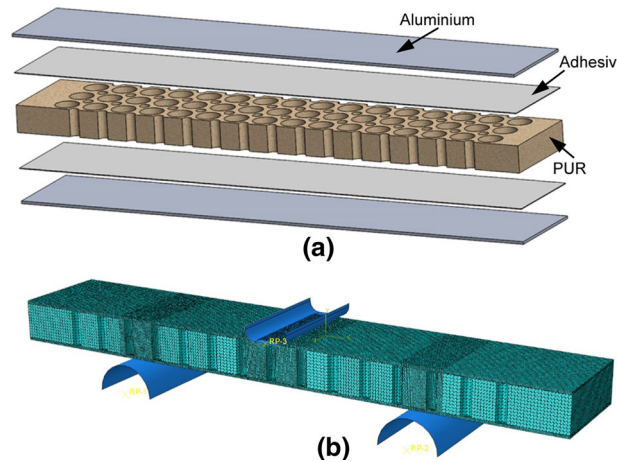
Exploded view of the composite sandwich beam components, presenting the geometry of the perforated core (a) and the meshed model (b)
